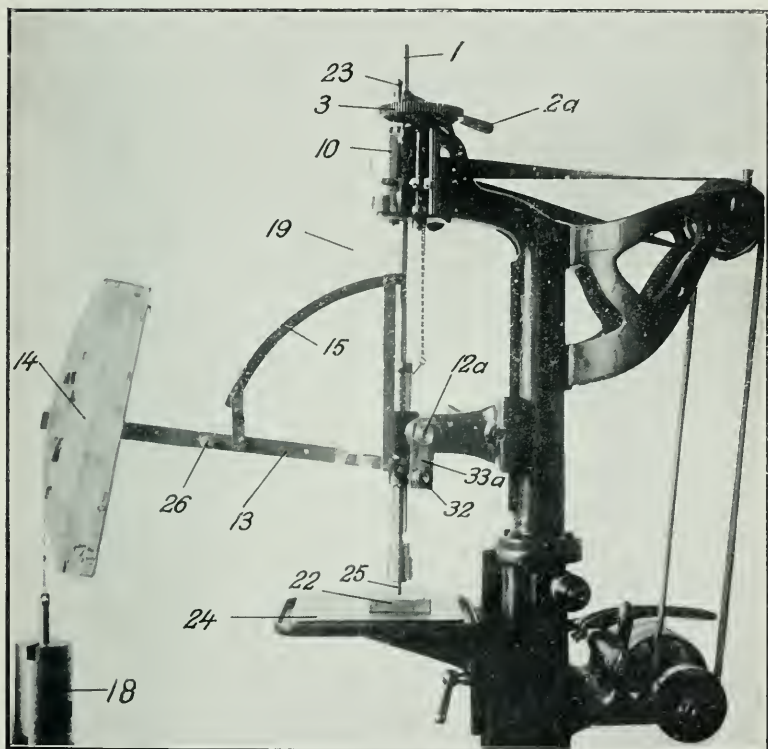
Hardness-testing Drill. Pattern III. (Kessner Type.)
